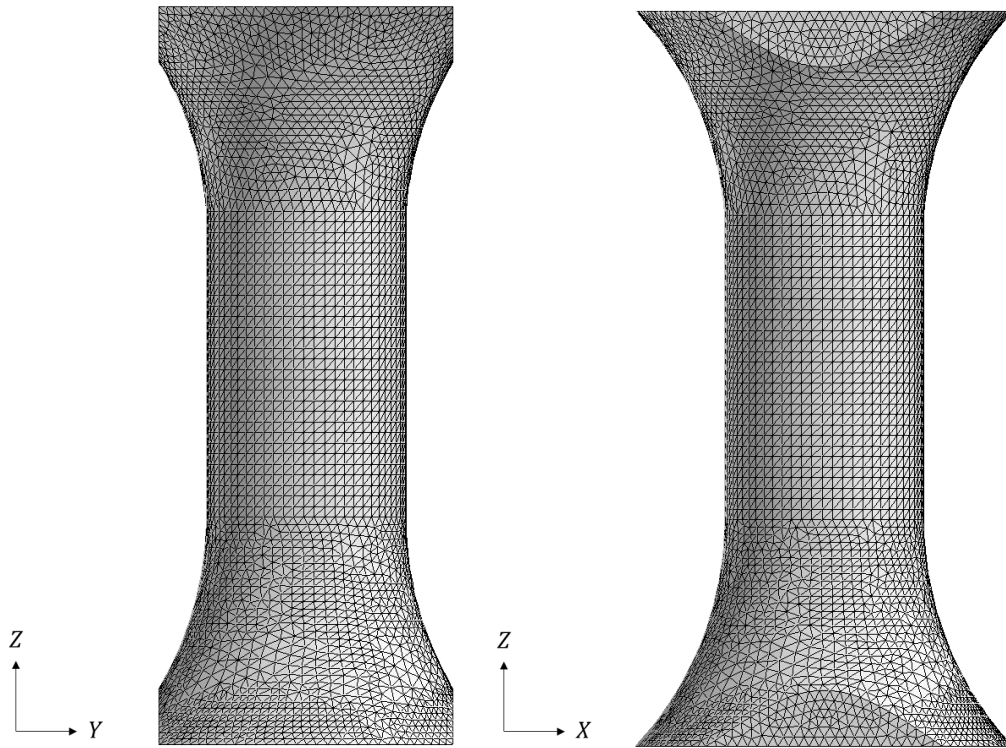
Illustration of the CAD mesh of the specimens used.
